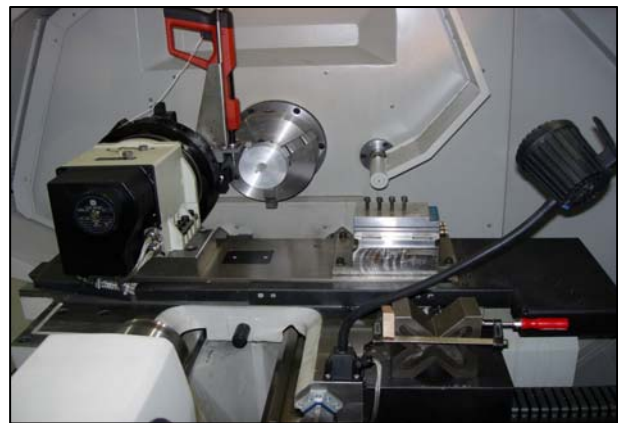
Experimental set-up with a device for impact-type interrupting of the cutting process
